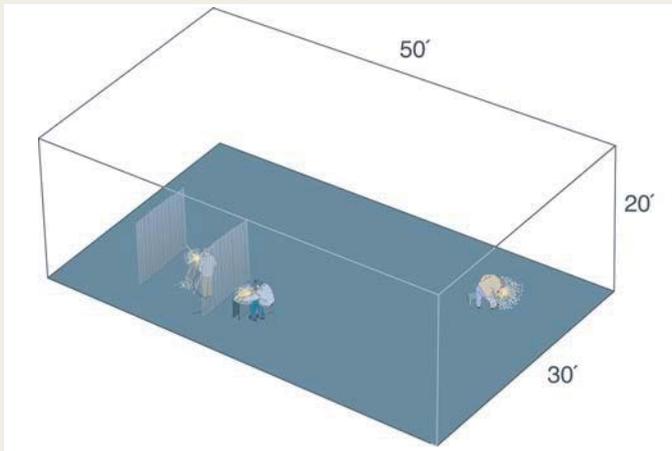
A 30,000-cu ft enclosed welding space. Dilution air assumes continuous welding without the use of air pollution collection devices.
